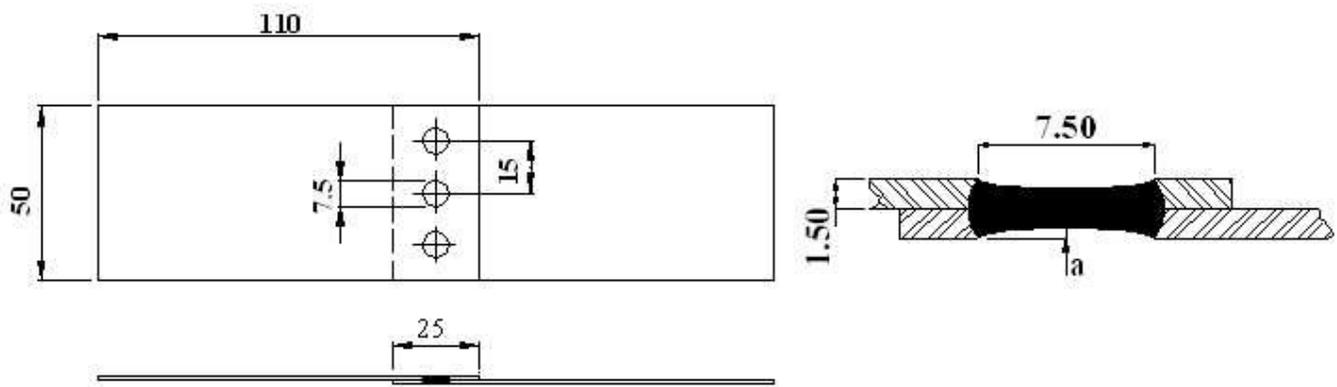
Welded specimen in study and spot weld geometry.
